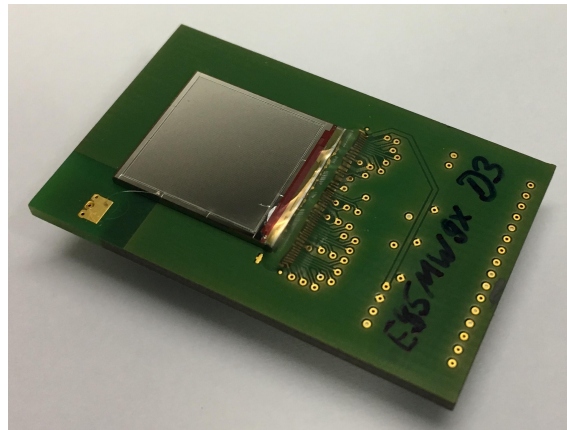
Picture of a GridPix on a carrier board, the bond wires connecting the chip's periphery to the pads on the carrier board (middle) are mechanically protected with a glue. A single wire bond connects the high voltage pad (middle left) to the grid of the GridPix where the bond wire is fixed with a tiny drop of conductive glue. Chip number and wafer name are written onto the carrier board to allow easy identification.
